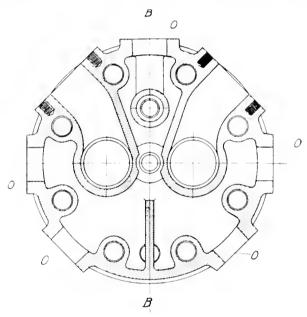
Cross-section through a Cylinder Head of Symmetrical Design
